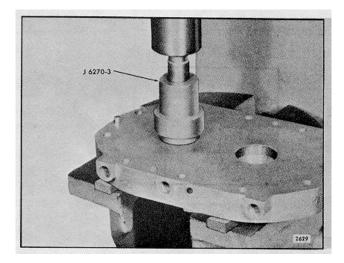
Installing Oil Seal (or Oil Seal Ring Collar) in End Plate
